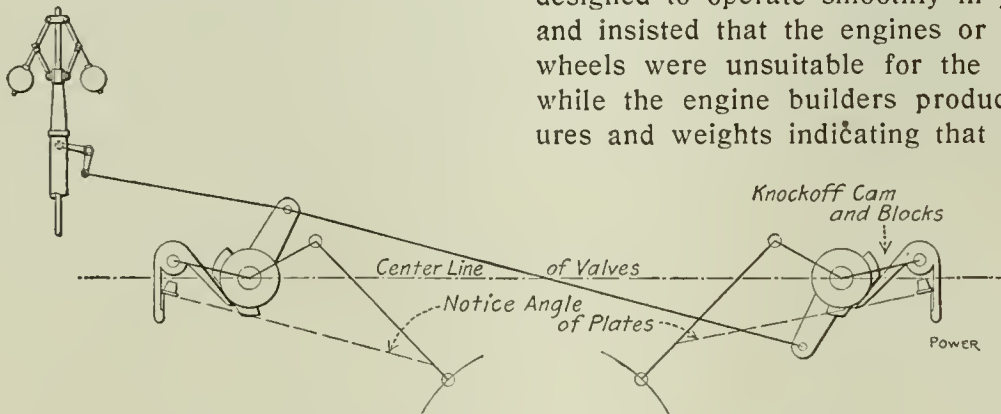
ORIGINAL ARRANGEMENT OF VALVE GEAR
